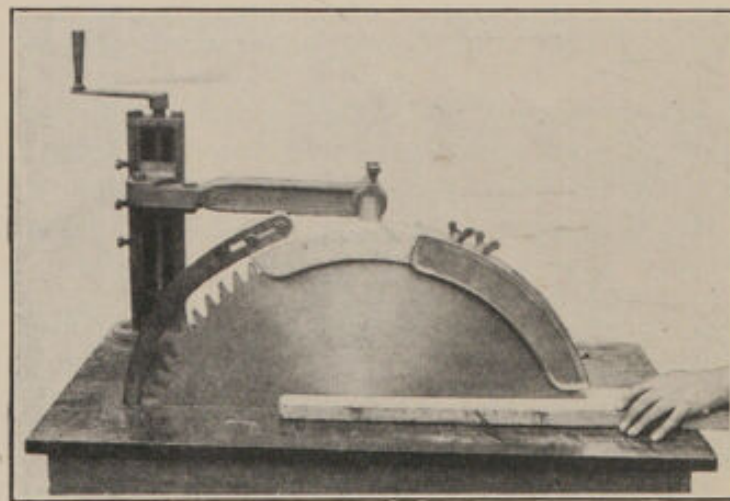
Circular Saw Guard. (Messrs. Wm. Cook & Sons, Glasgow.)
